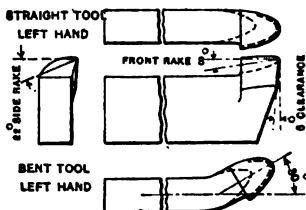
Sellers Angles for Round-nosed Roughing Tools for Wrought-iron and Steel (Lathe and Planer Tools).
